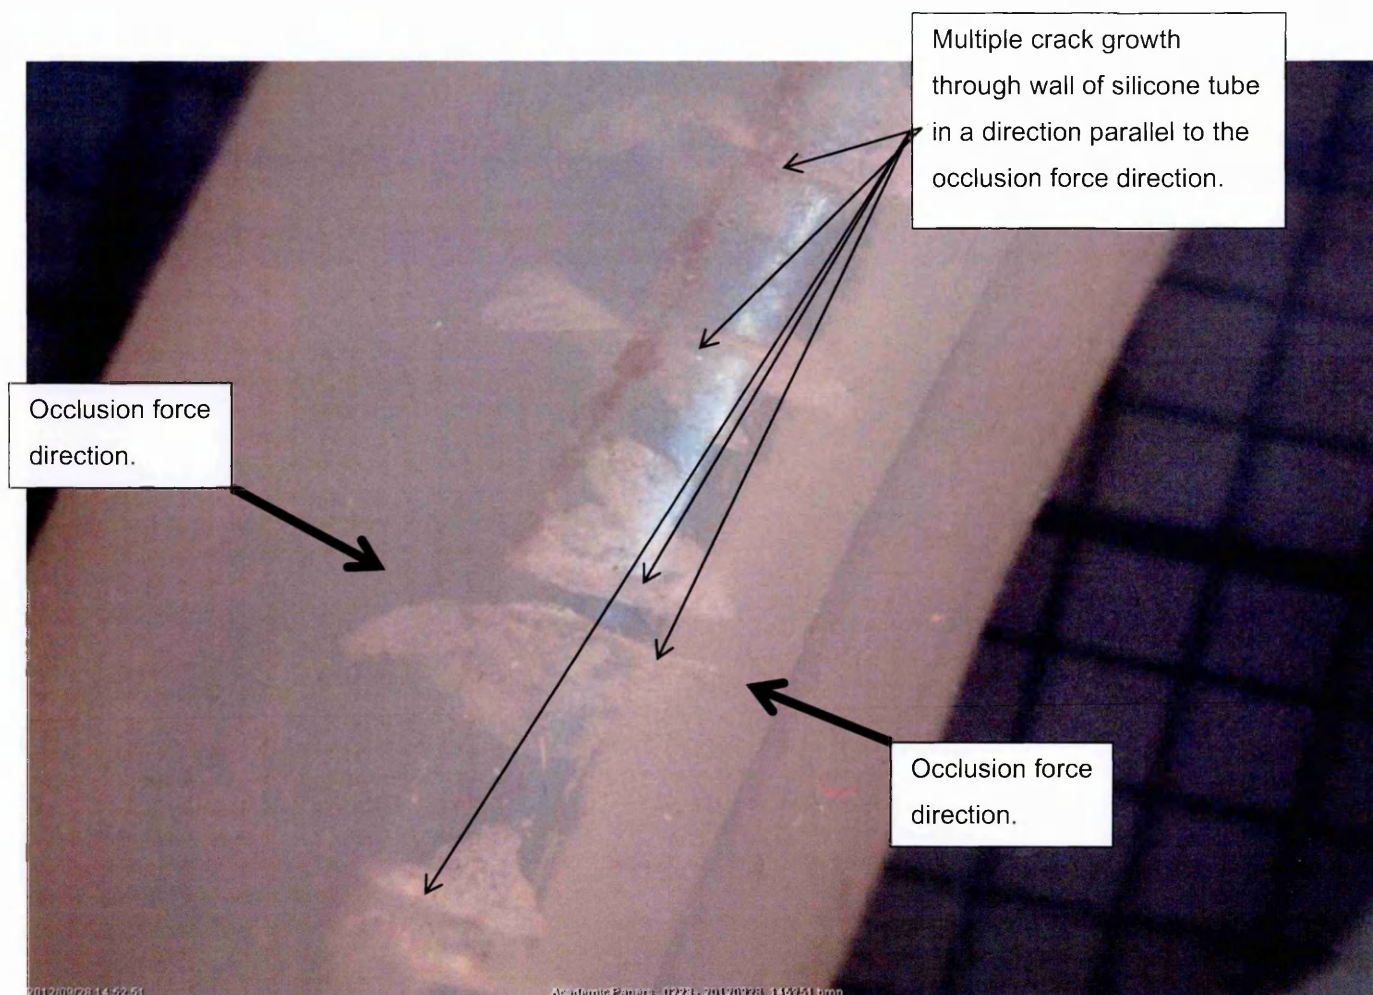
Silicone tubing showing multiple crack growth in tube wall
